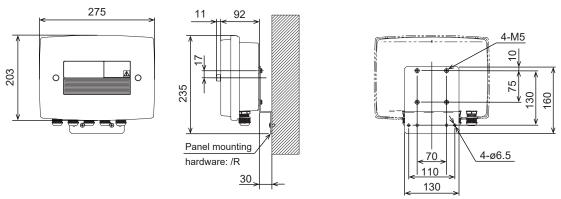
Installation of rack or wall mounting hardware (/R) on the terminal box A
